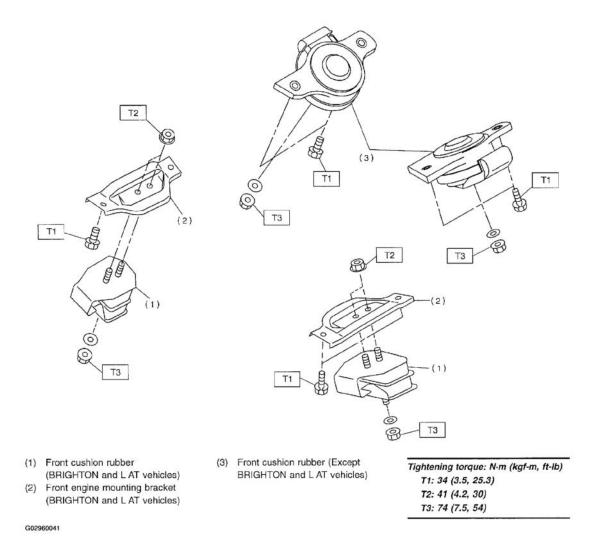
Identifying Engine Mounting Components Courtesy of SUBARU OF AMERICA, INC.
